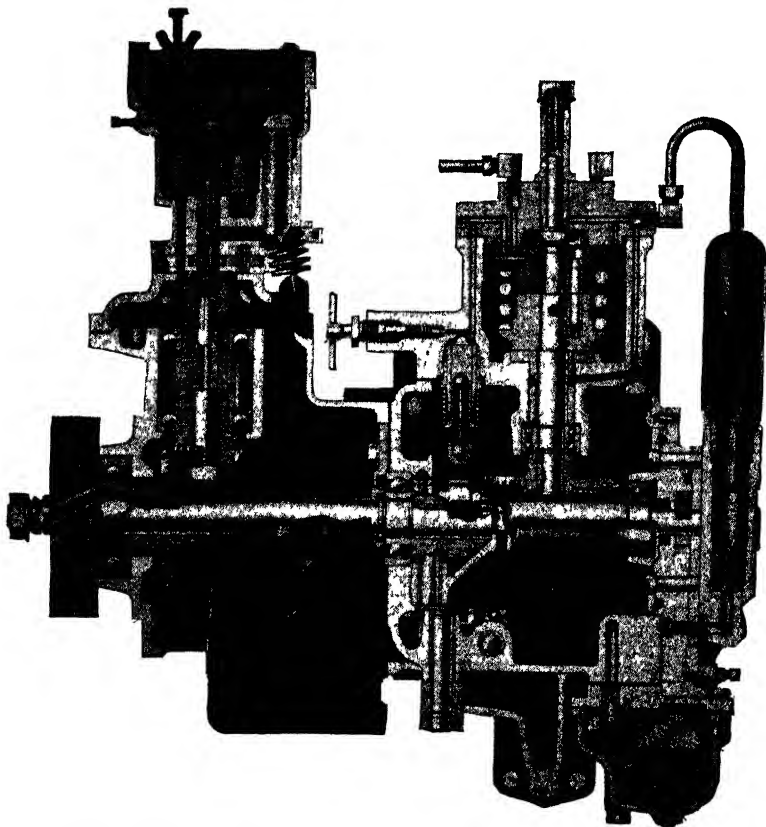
SECTION OF CUMMINS FUEL PUMP AND GOVERNOR WITH HYDRAULIC RELAY.
